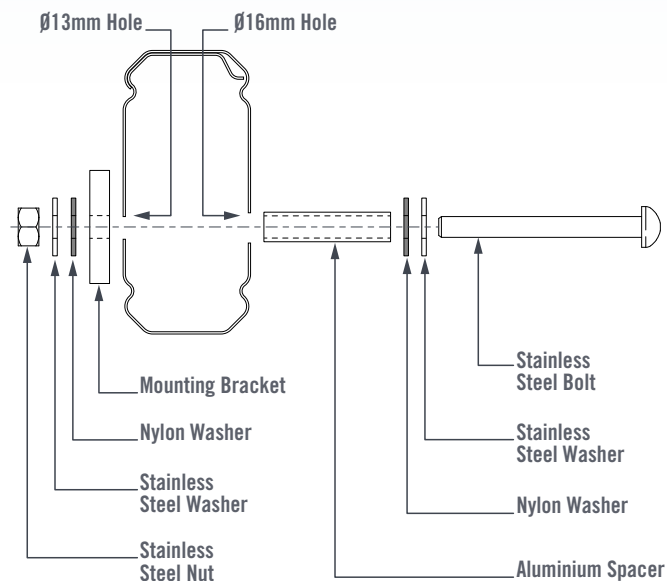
STAINLESS STEEL ATTACHMENT BOLT CONFIGURATION
